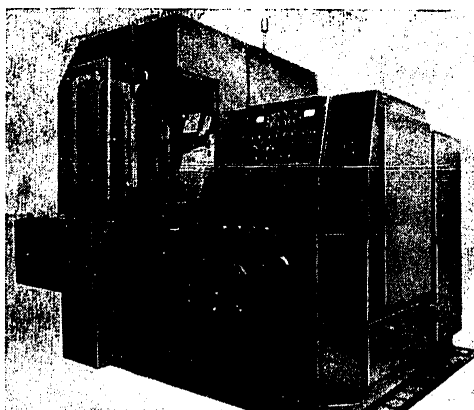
Universal model 5A841 gear grinding machine with digital programmed control.
